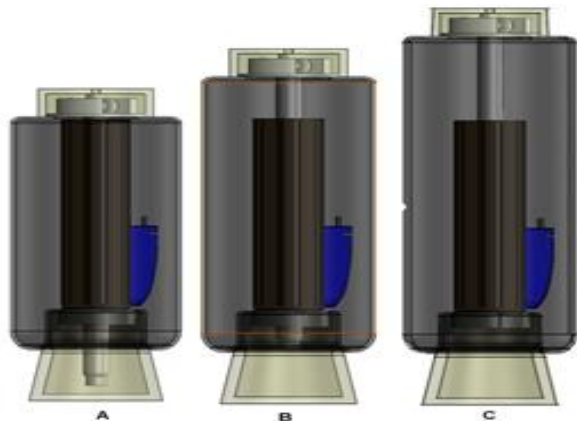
Three displacement strokes of the assembled AVI system where the guiding system and the selected linear shaft motor are embedded within a customized air spring.
